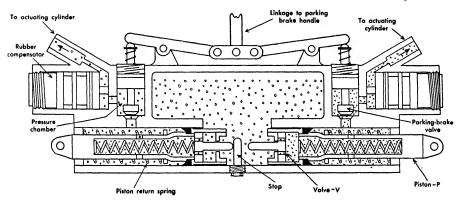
A diagrammatic drawing of a master cylinder for a hydraulic brake system (North American type).
